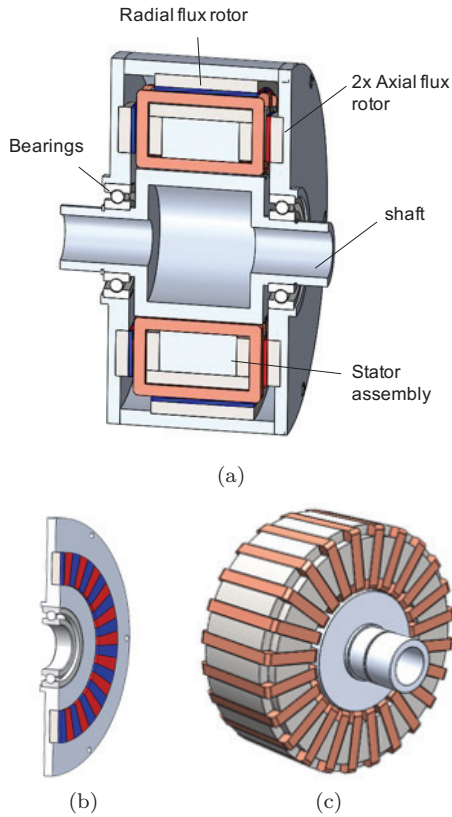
CAD design for the proposed machine. (a) Cross-section view of motor assembly. (b) Axial-flux rotor. (c) Stator assembly.
